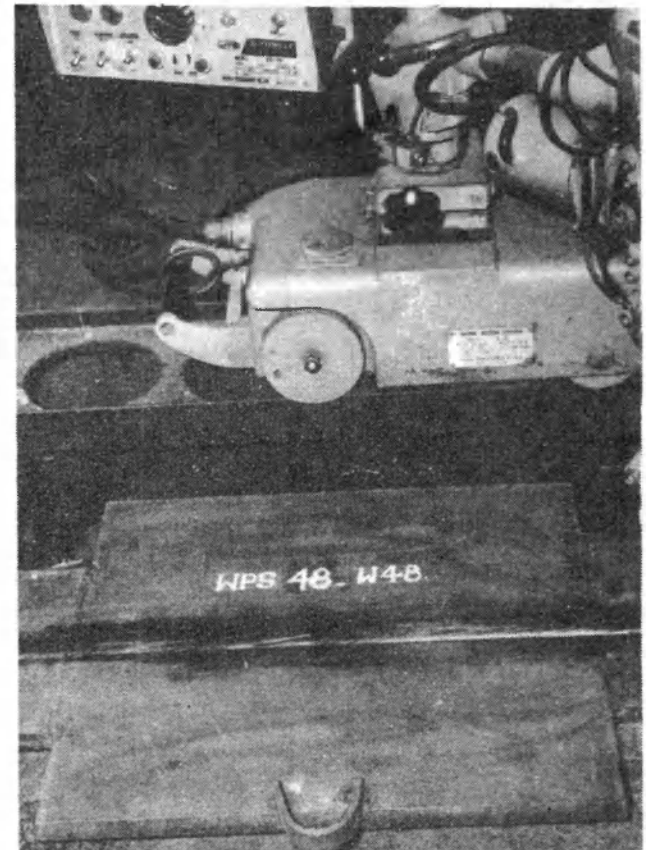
Submerged ARC one side FAB Welded Plate (view from top).
